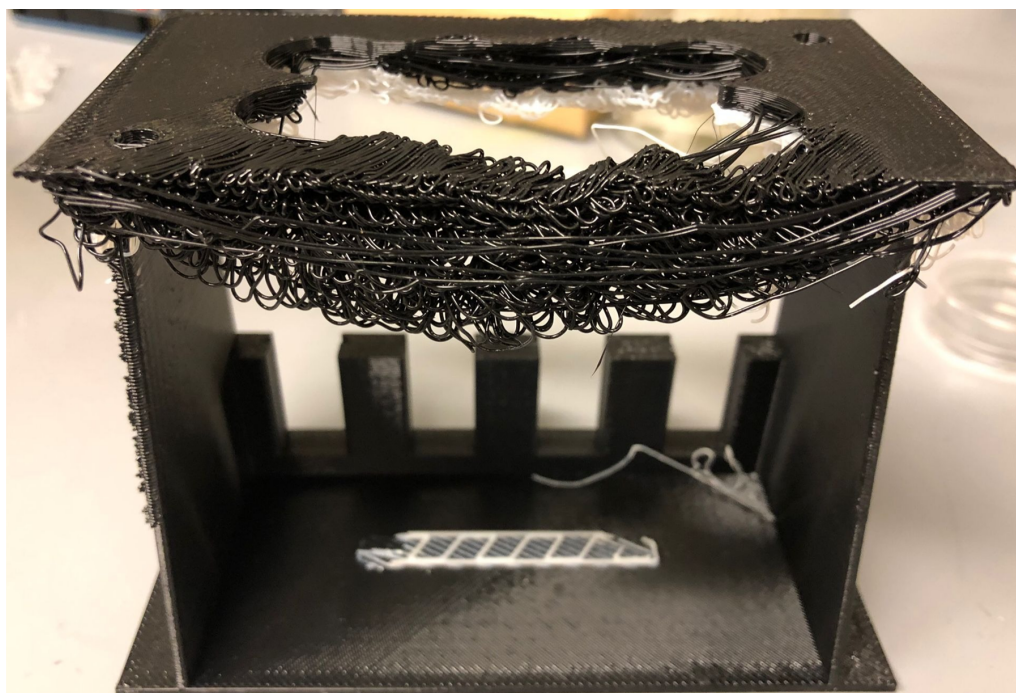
3D printer issue. Specific designs could not be printed due to insufficient support, causing the printer to extrude material in a vacuum.
